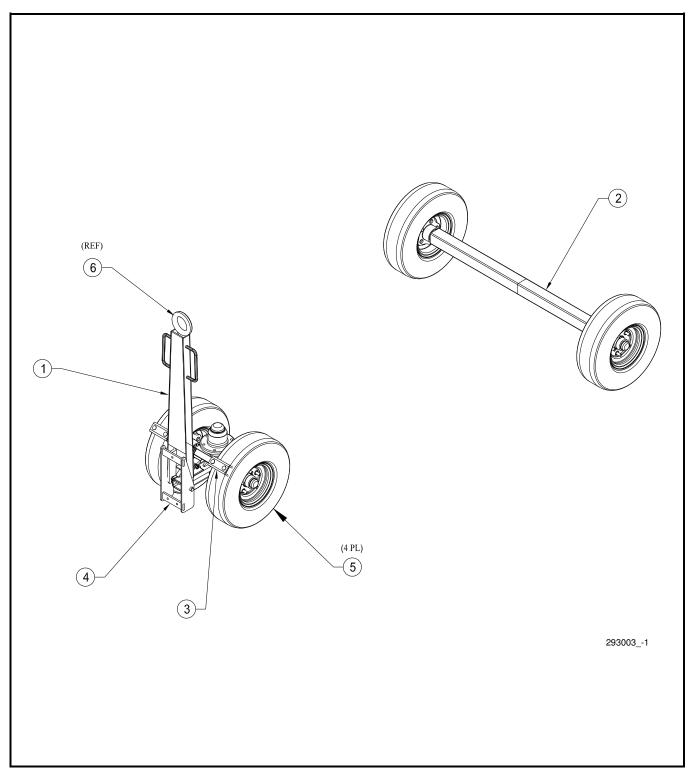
Running Gear Assembly, 4400 Platform. (Sheet 1 of 2).
